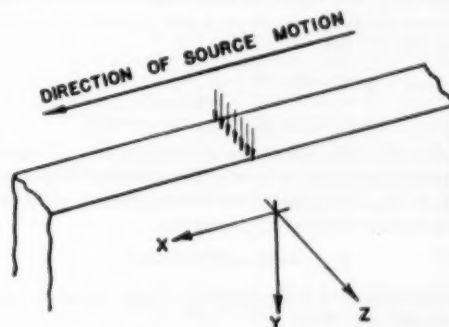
LINE HEAT SOURCE MOVING ON WORKPIECE
